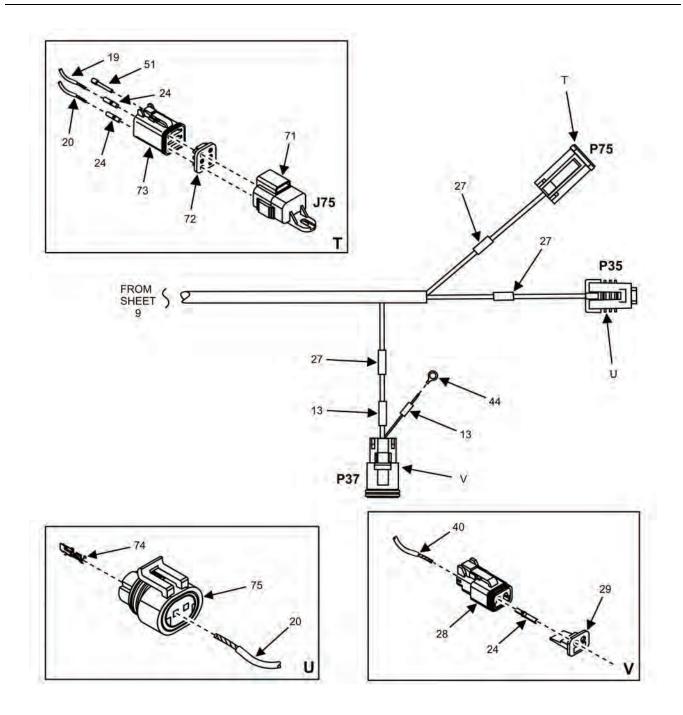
Engine Wiring Harness (Sheet 10 of 15).
